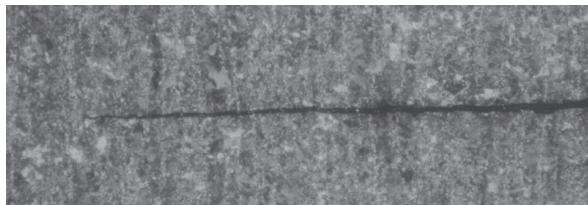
A drill pipe tube fatigue crack. (x100)
